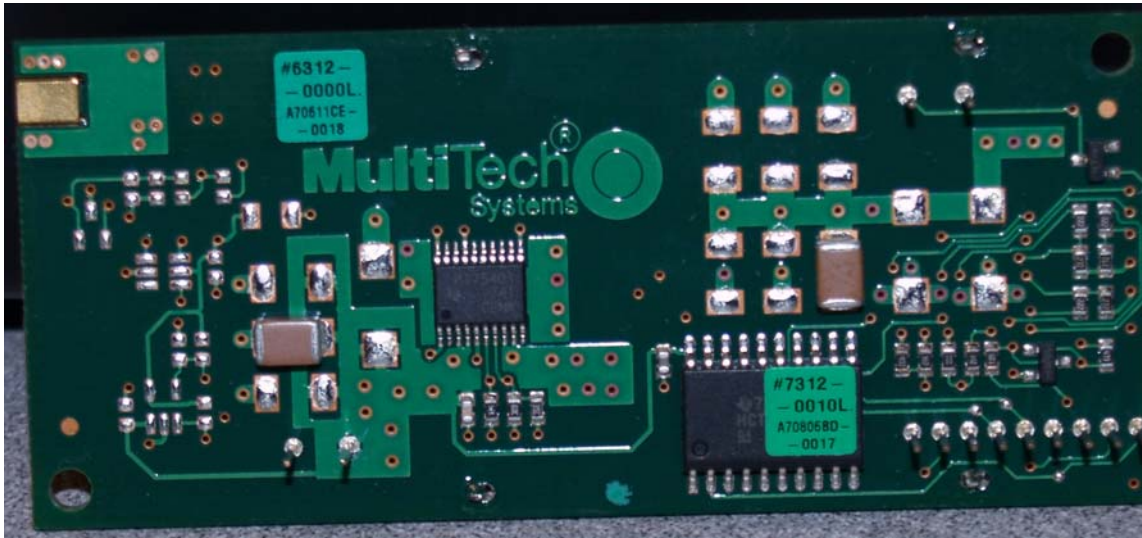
HomeBase (HB-100) – Sprint CDMA Modem PCB – bottom side
